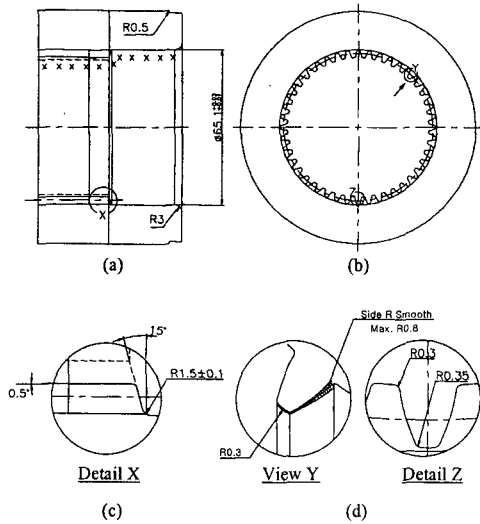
Design of die: (a) side view of die ; (b) top view of die ; (c) detail of X from side view ; (d) detail view of Y and detail Z from top view (unit: mm)
